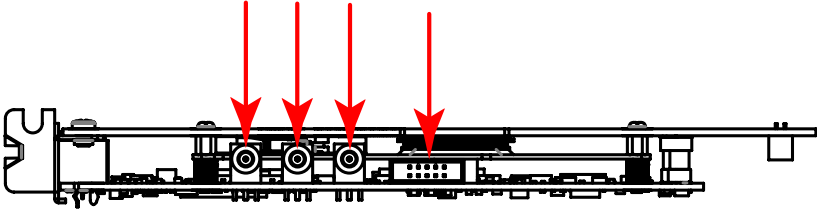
HDV62A PCB Side View (showing I/O bracket connectors)
